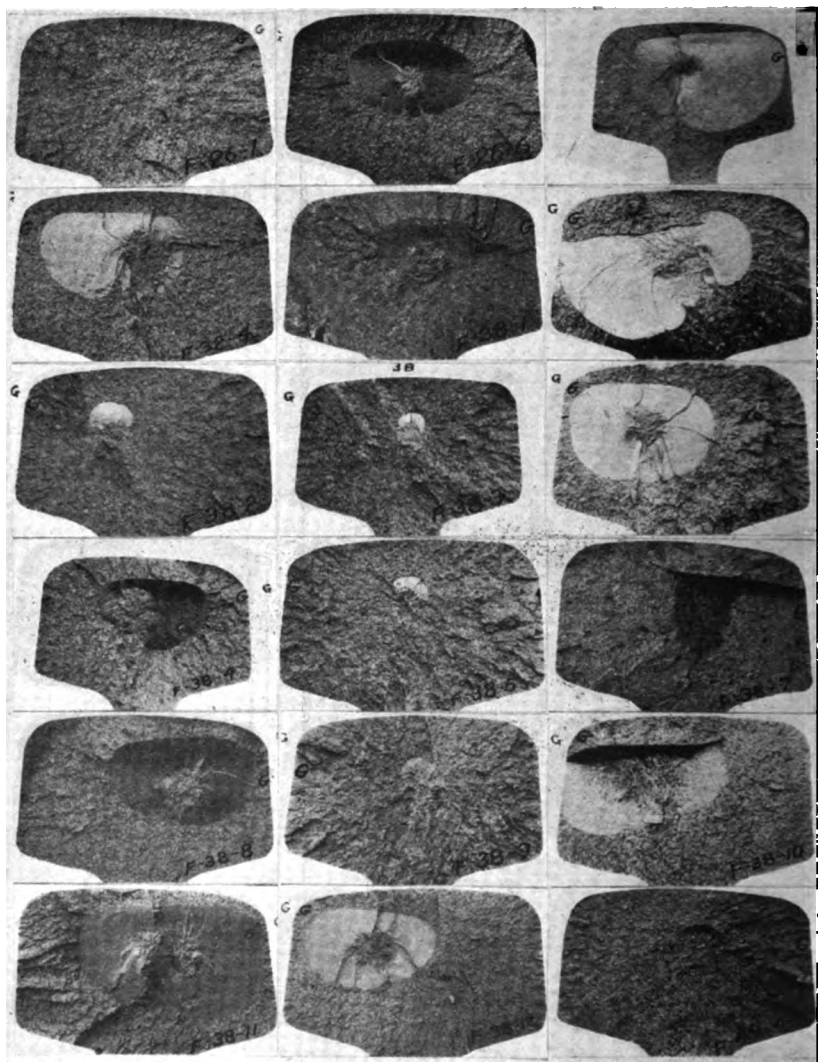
FISSURES FOUND IN DROP TEST IN F RAILS.
